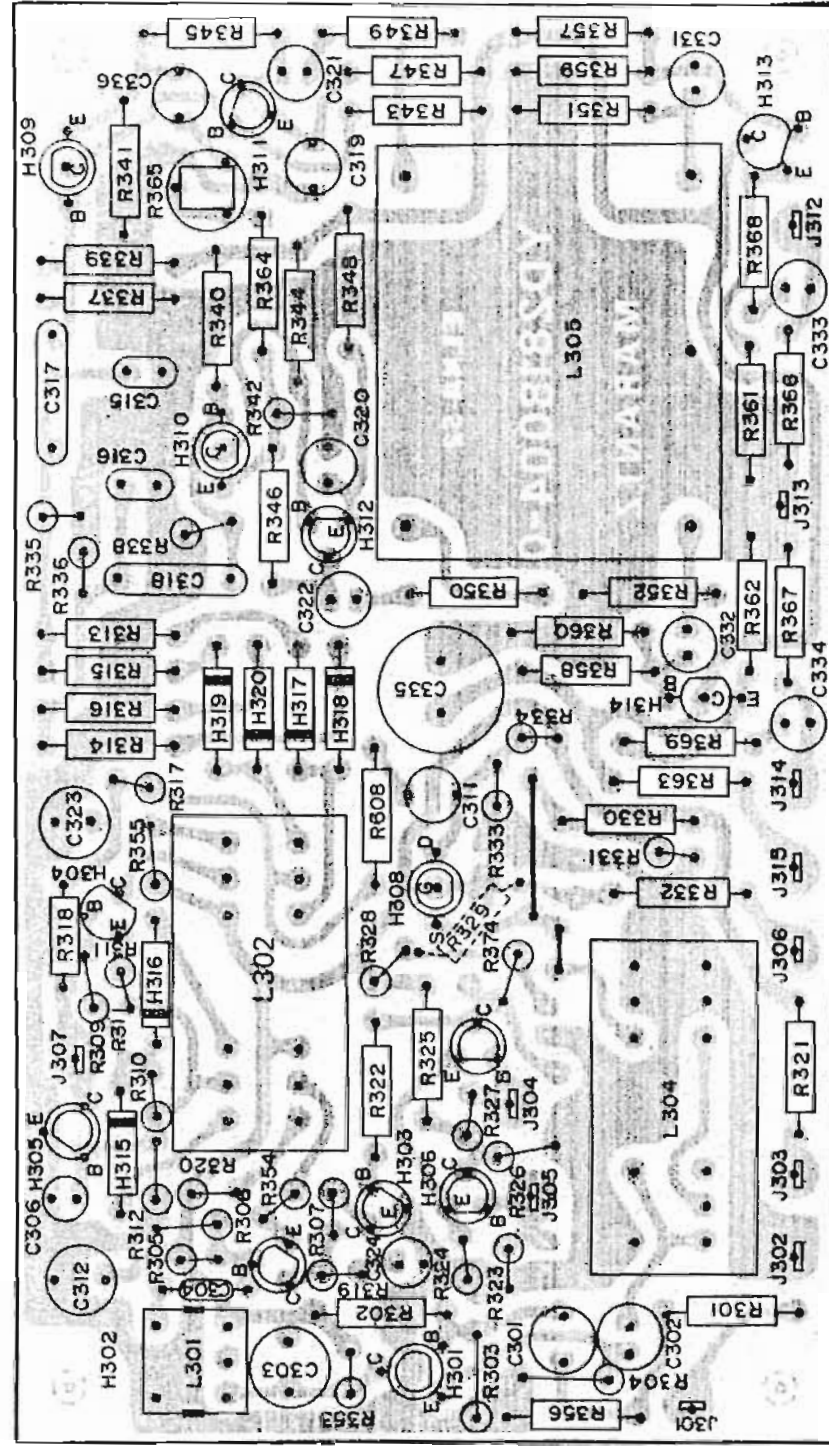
MPX/Stereo Decoding Amplifier Assembly P300 Component Locations
